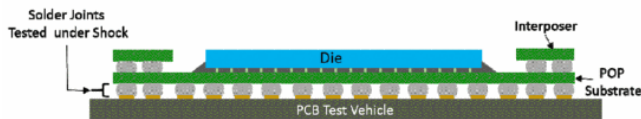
Assembly stack-up of the POP component test vehicle soldered on the PCB test vehicle [22].
